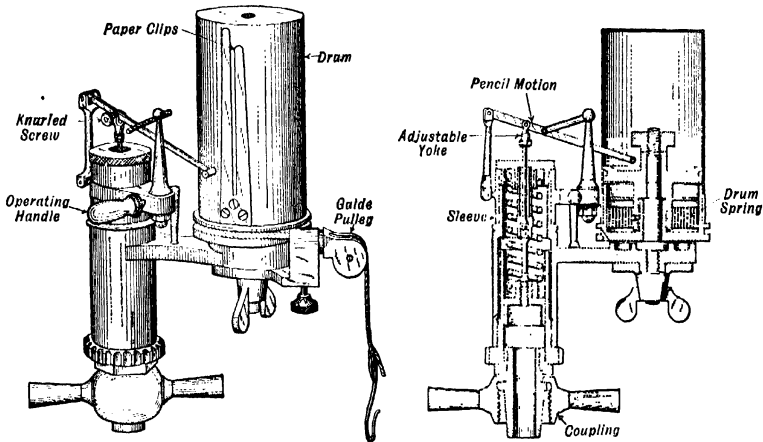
Outside and Sectional Views of Thompson Inside Spring Steam Indicator.
